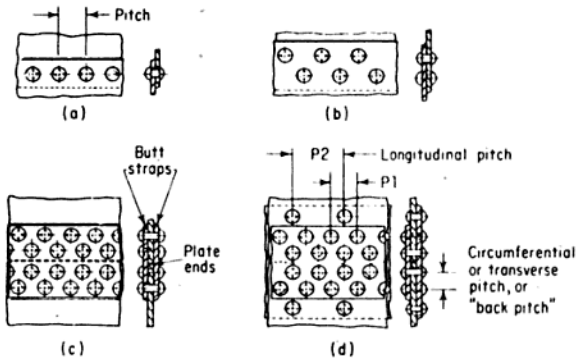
Riveted joints. (a) Single-riveted lap joint. (b) Double-riveted lap joint. (c) Double-riveted butt joint with double butt strap. (d) Triple-riveted butt joint with double butt straps.
